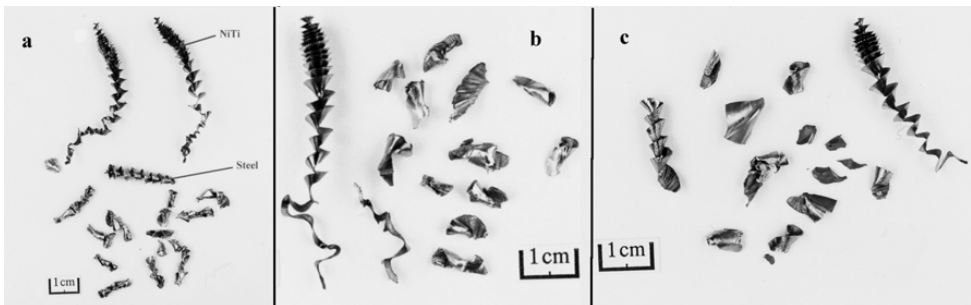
(a) The drilling chips with feed rate of 0.1 mm/rev., (b) drilling chips with a feed rate of 0.15 mm/rev. and (c) with 0.2 mm/rev. A cutting speed of 50 m/min was used. Conventional cutting fluid supply was used
